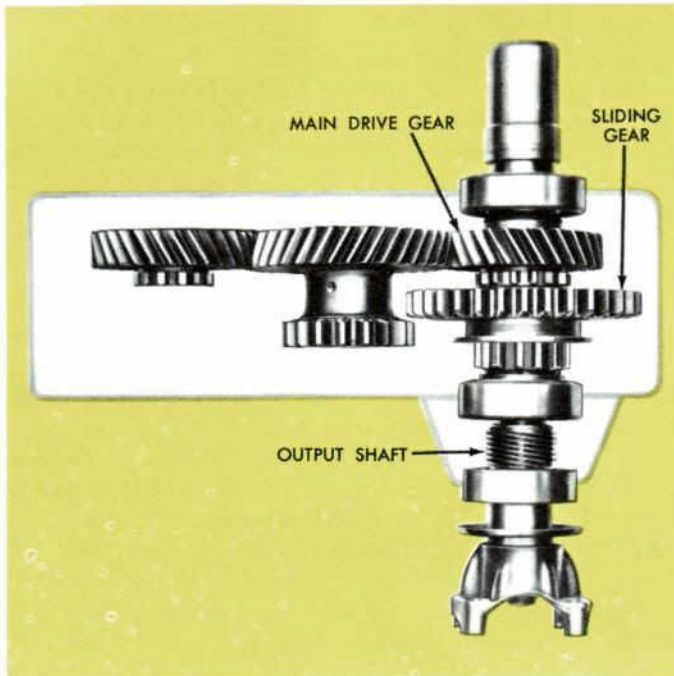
Rear Output Shaft and Sliding Gear and Clutch
